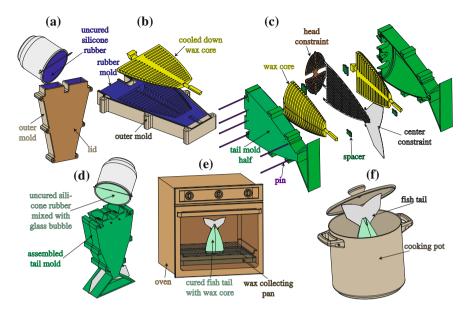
Fish tail fabrication process: a Pour and cure a rubber mold, b pour wax cores, c combine head constraint, center constraint and wax cores with tail mold halves, d pour rubber mixed with glass bubbles into assembled tail mold, e using an oven melt out wax core from the cured fish tail, and f cook out remaining wax to create desired actuator cavities
